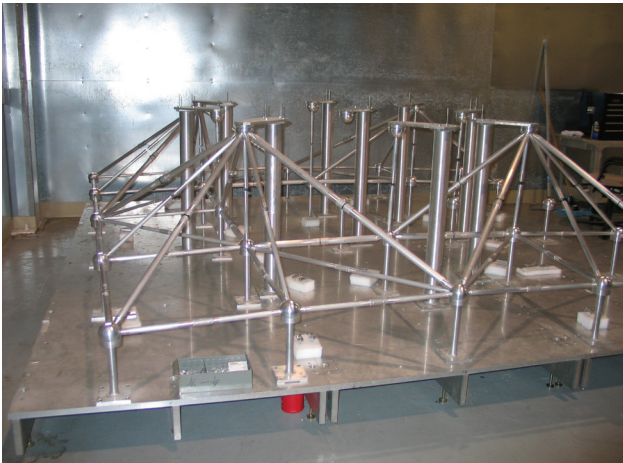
A partially completed subframe is assembled upside down on an assembly jig.
